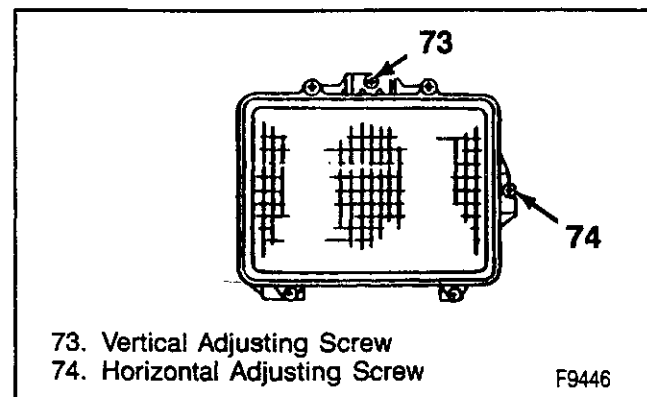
Headlight Aiming Screws (Dual Headlamps)
